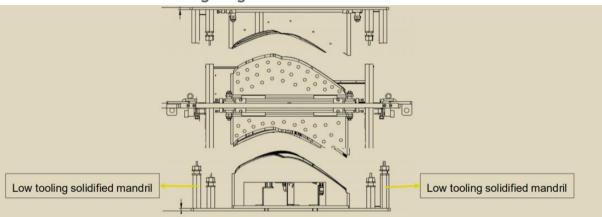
Around the tooling are the mandril, they are used to adjust the welding height
